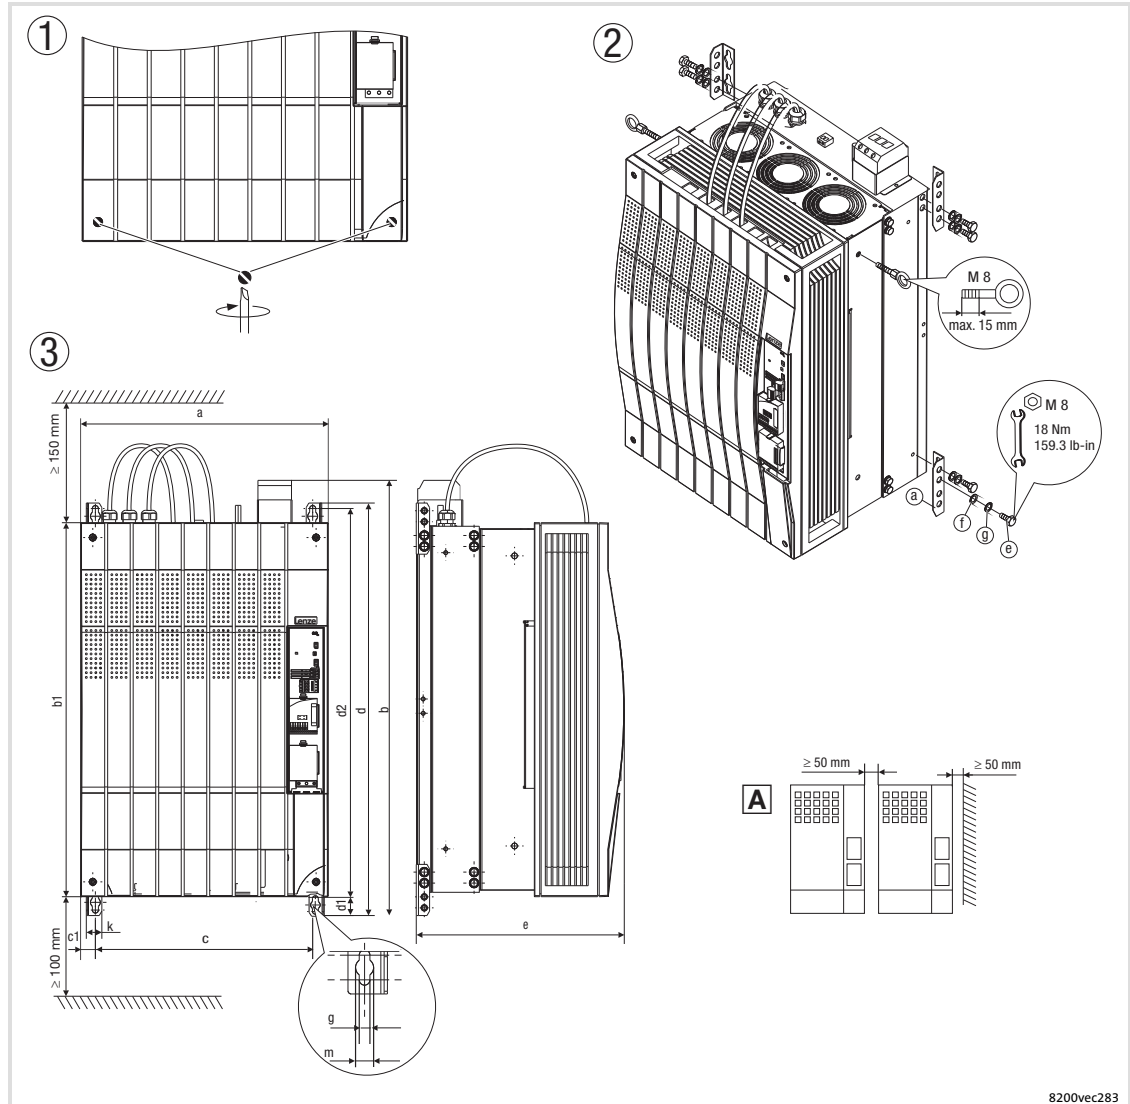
Standard mounting with fixing brackets 75 ... 90 kW
